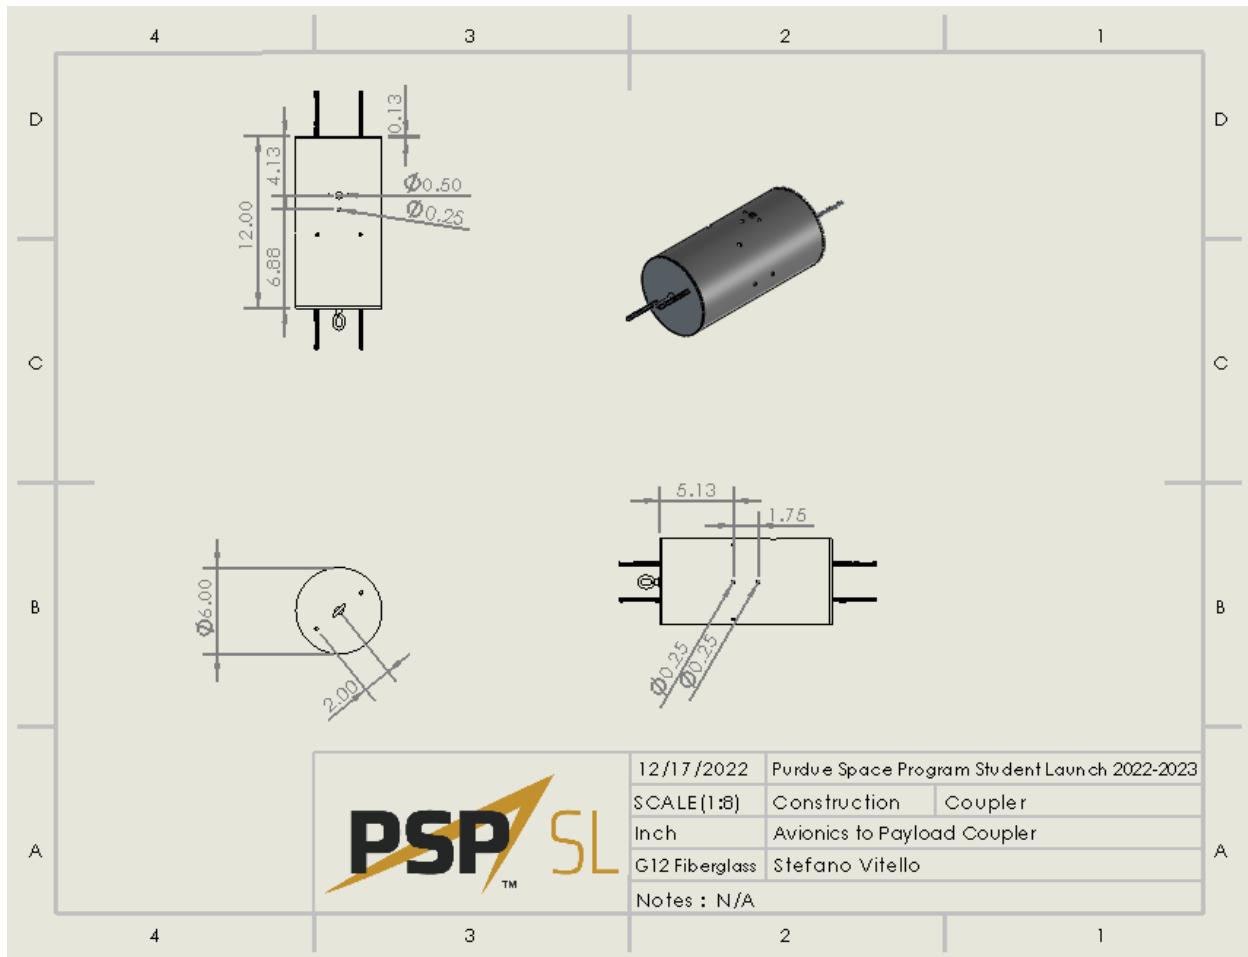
Technical Drawing for Avionics to Payload Coupler
